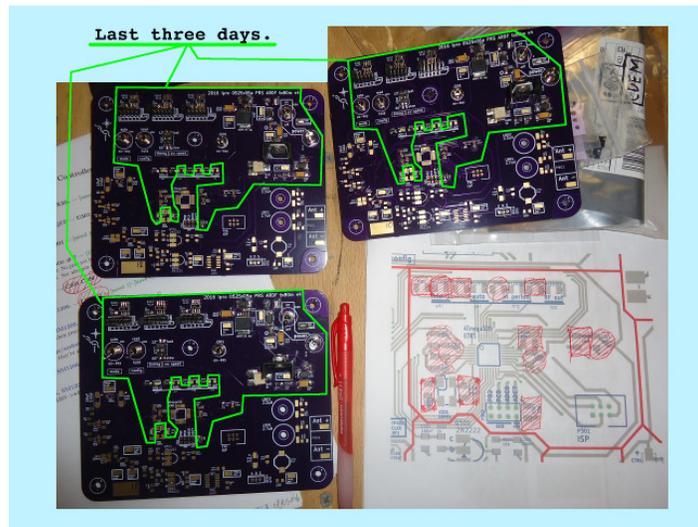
Partially completed controller SM. The green outline shows the area of the board already soldered. The paper shows the layout of the controller SM with my “stripping out” of components that I have already soldered on.
